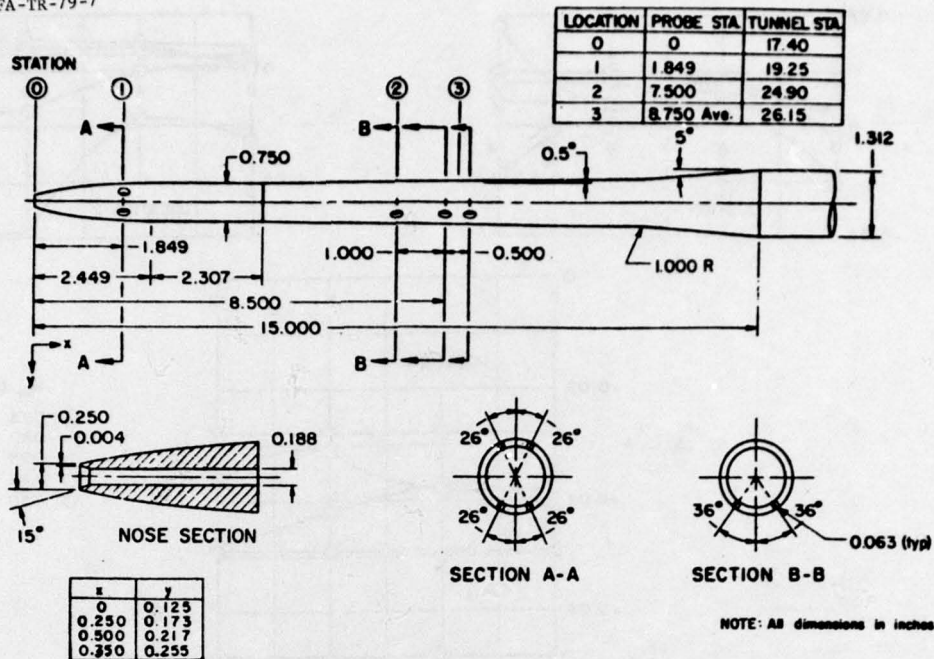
Details and Dimensions of Probe D (Ref. 6)
